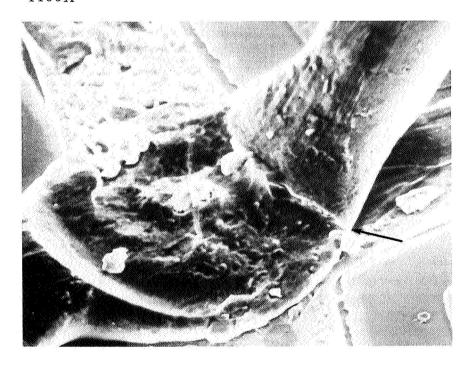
Manufacturer "A" 2N2222A, T.C. Wedge Bond, Emitter Bond, Microcracks at Heel After 4700 Power Cycles. Device Electrically Still Good.
